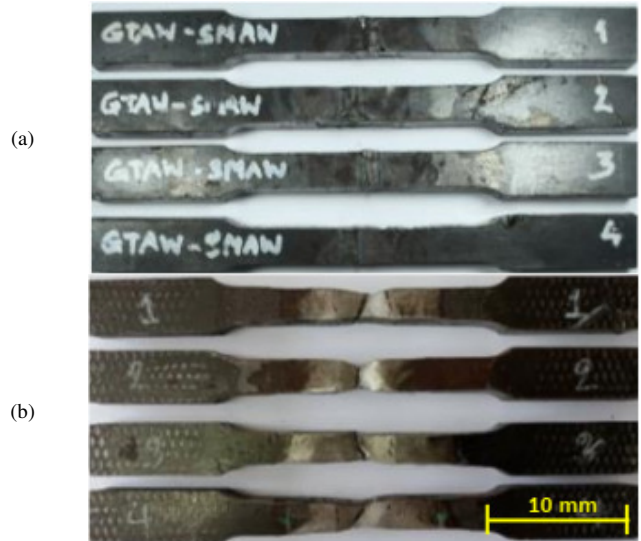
Test specimen: (a) specimen before tensile test, (b) fractured specimen after tensile test.
